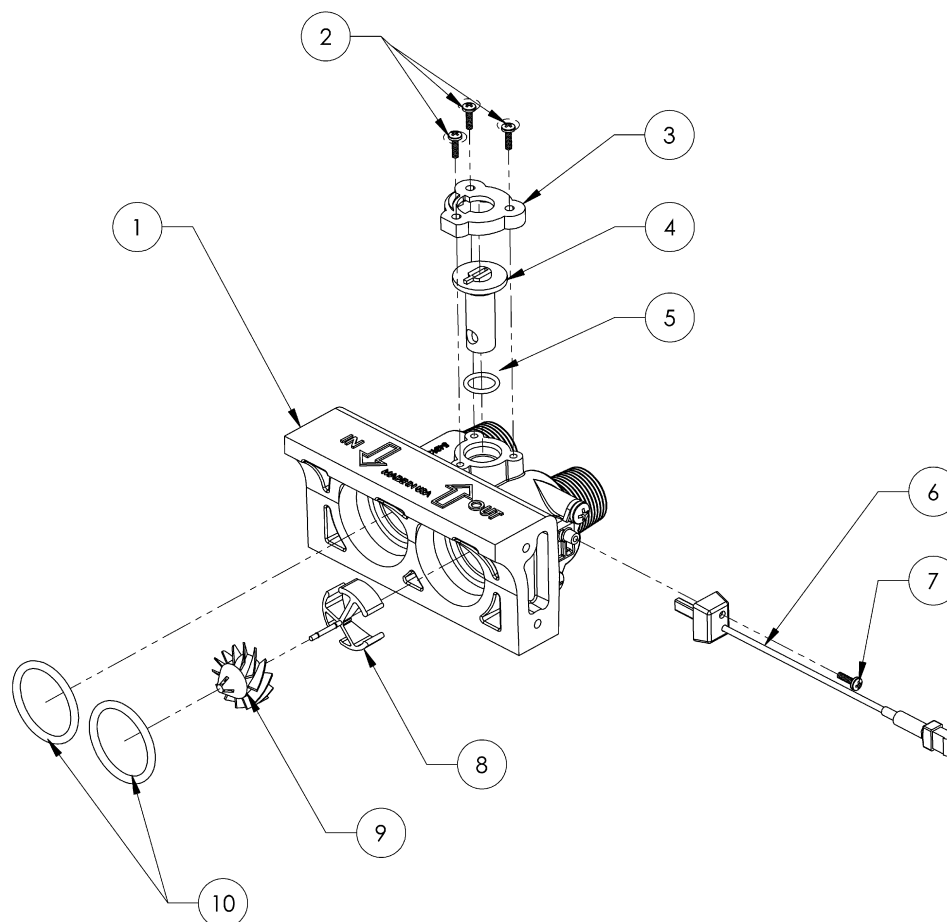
3/4-inch I/O Adapter Assembly with Blending Valve
